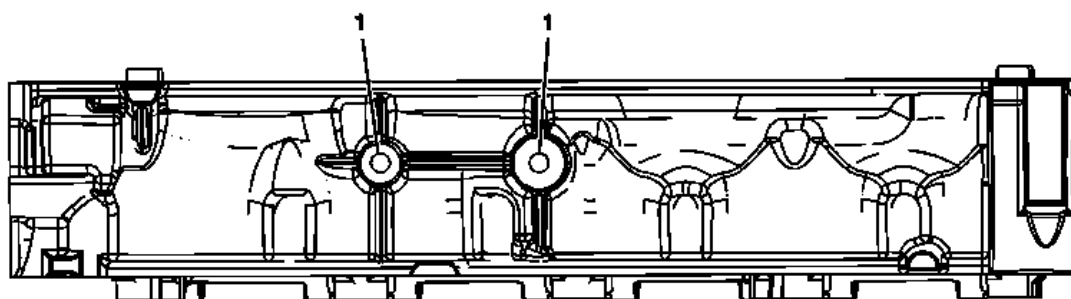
Identifying Bolt Size & Locations On Lower Crankcase - Left
